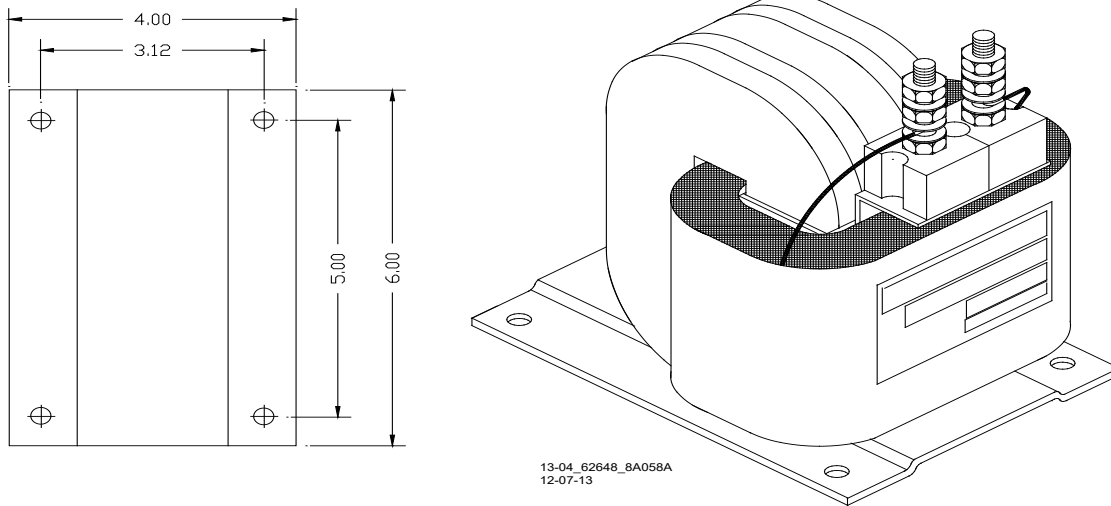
62648/8A065A Battery Choke with Mounting Dimensions
